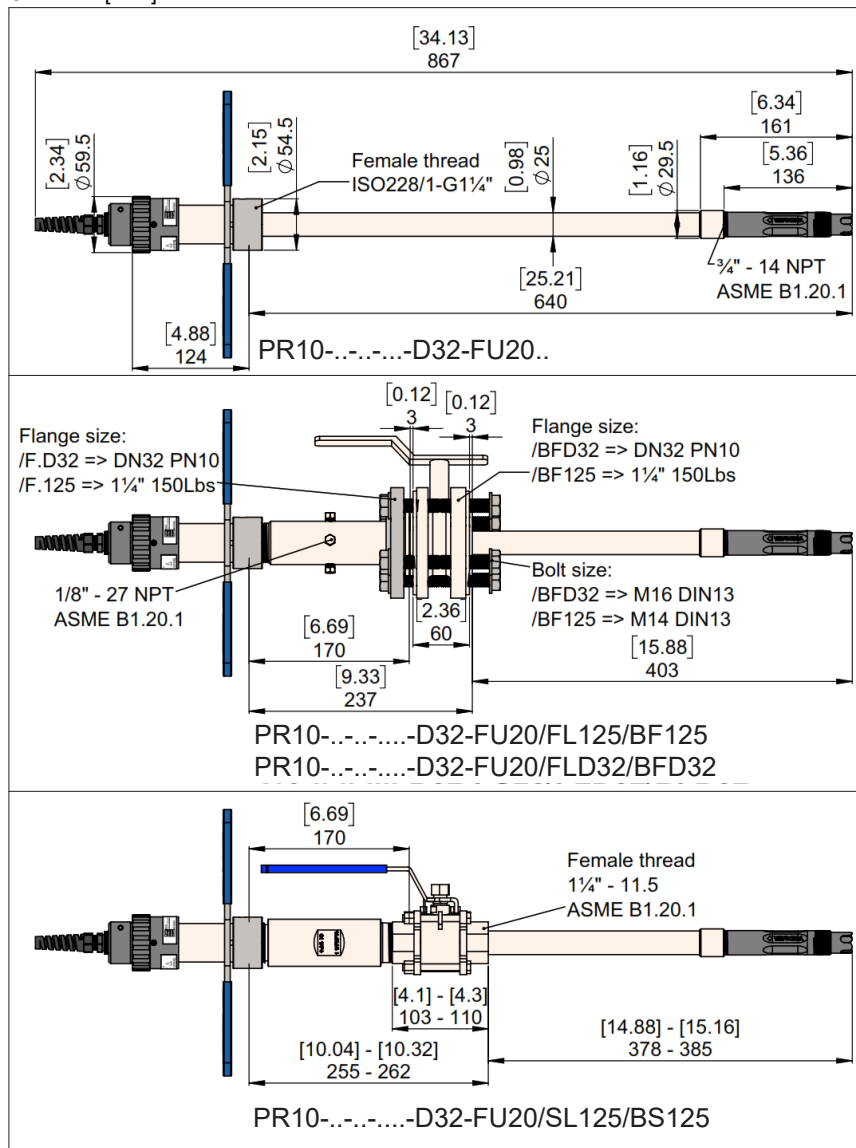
Dimensional drawing PR10...-D32 with mounted SC4A sensor
